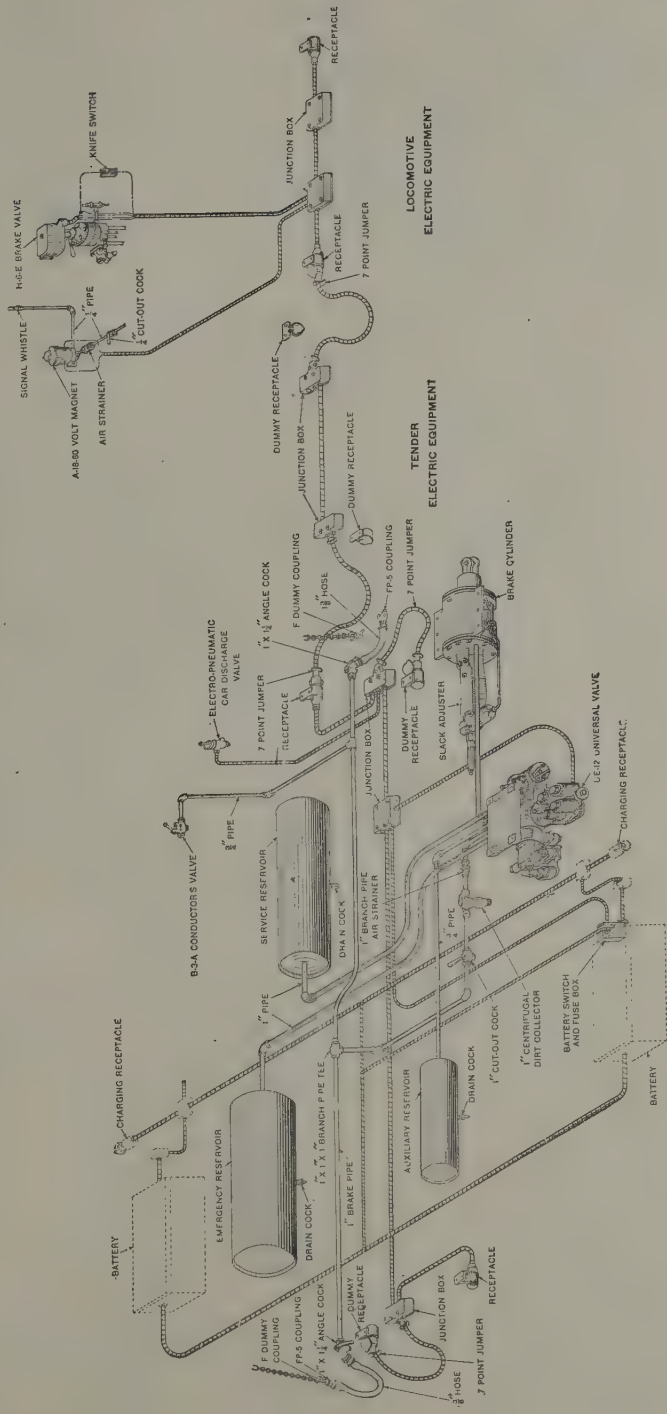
Piping Diagram of Westinghouse Universal Common Standard Electro-Pneumatic Brake Equipment, Schedule UCE, Complete for Engine, Tender and Car.
